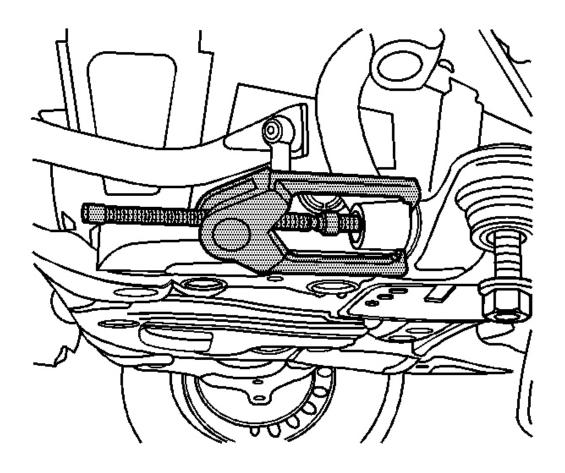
Disconnecting Shock Module Yoke From Lower Control Arm Courtesy of GENERAL MOTORS CORP.
